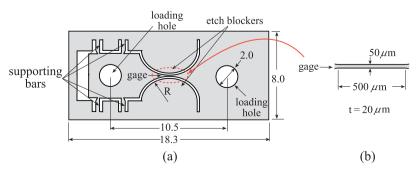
(a) Dog-bone specimen and frame; dimensions in millimeters. (b) Gage; dimensions in microns (t = thickness).
